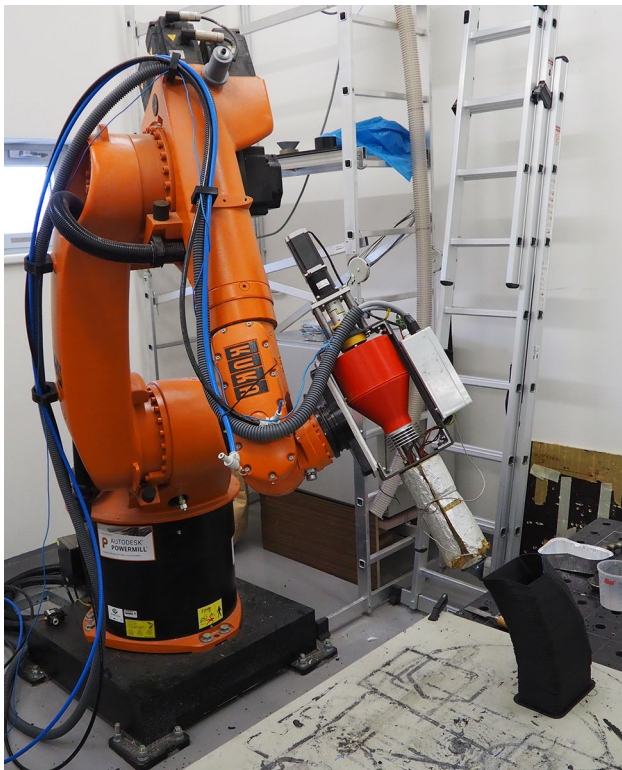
Robotic arm with the screw extruder during a multi-axis print
